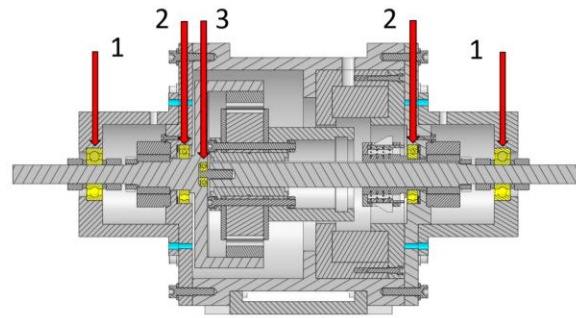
Bearing locations: support bearings (1), housing bearings (2), inner to outer shaft support bearing (3).
